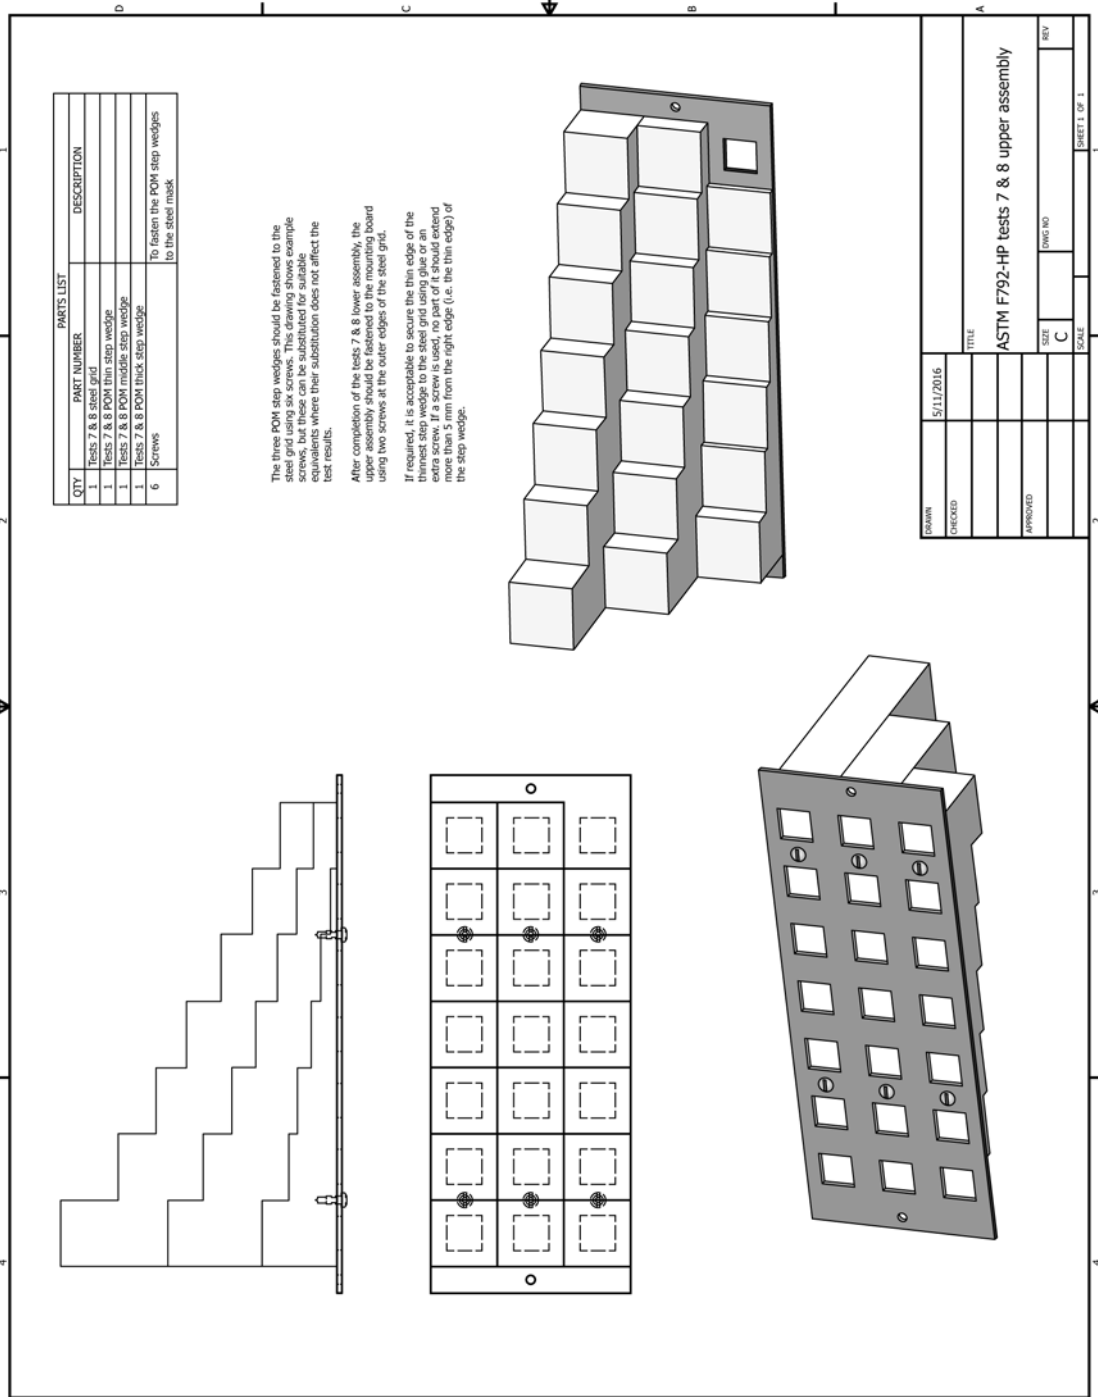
Practice F792 – HP Mechanical Drawing
